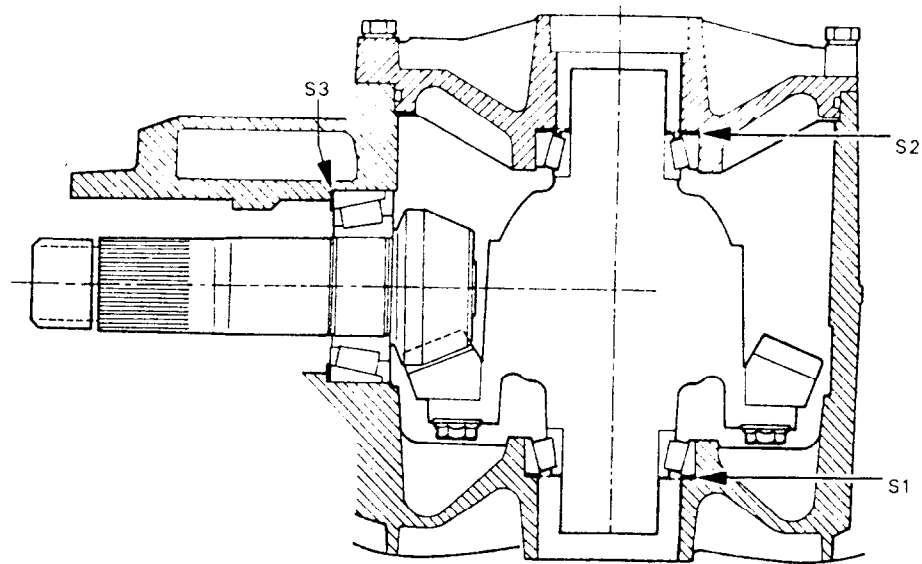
Installation of Pinion Shaft Outer Bearing Race
